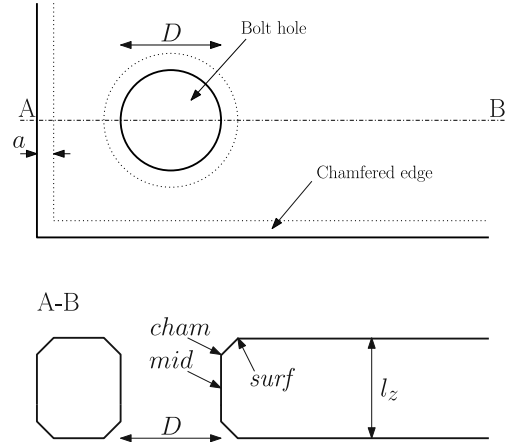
Sketch of a bolt hole in a part of a glass plate with chamfered edges
